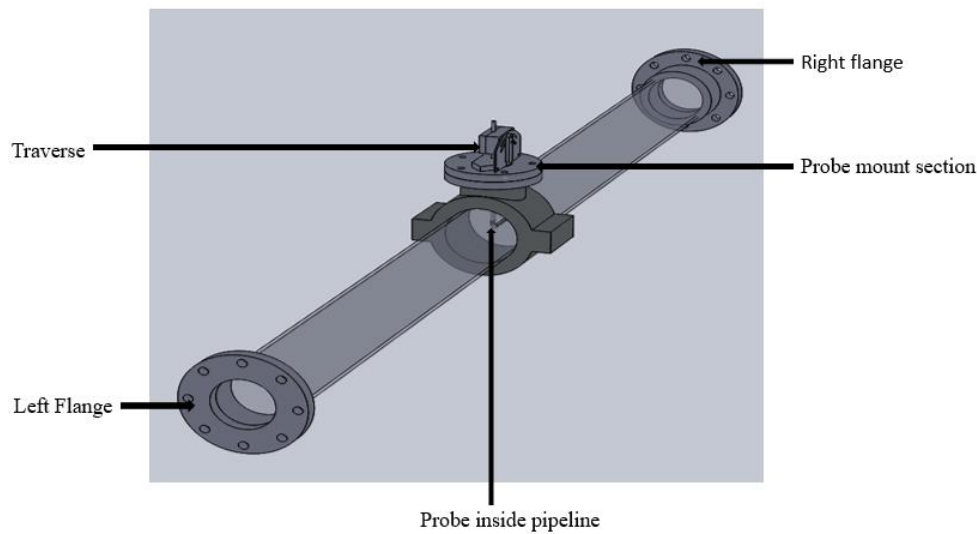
CAD diagram of hydraulic pipeline calibration setup design
